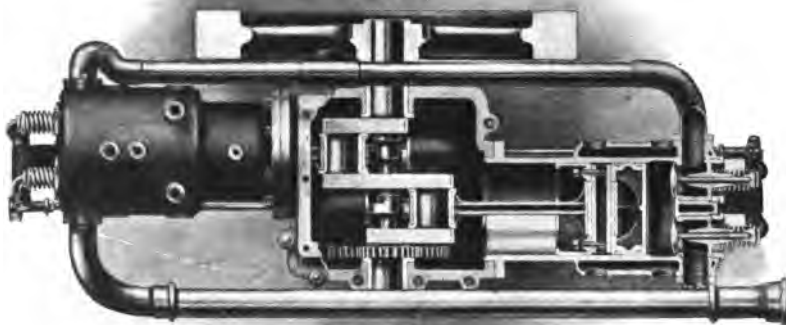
Section of Two-Cylinder Engine Permitting of Access to Valves through Spark-Plug Hole.
